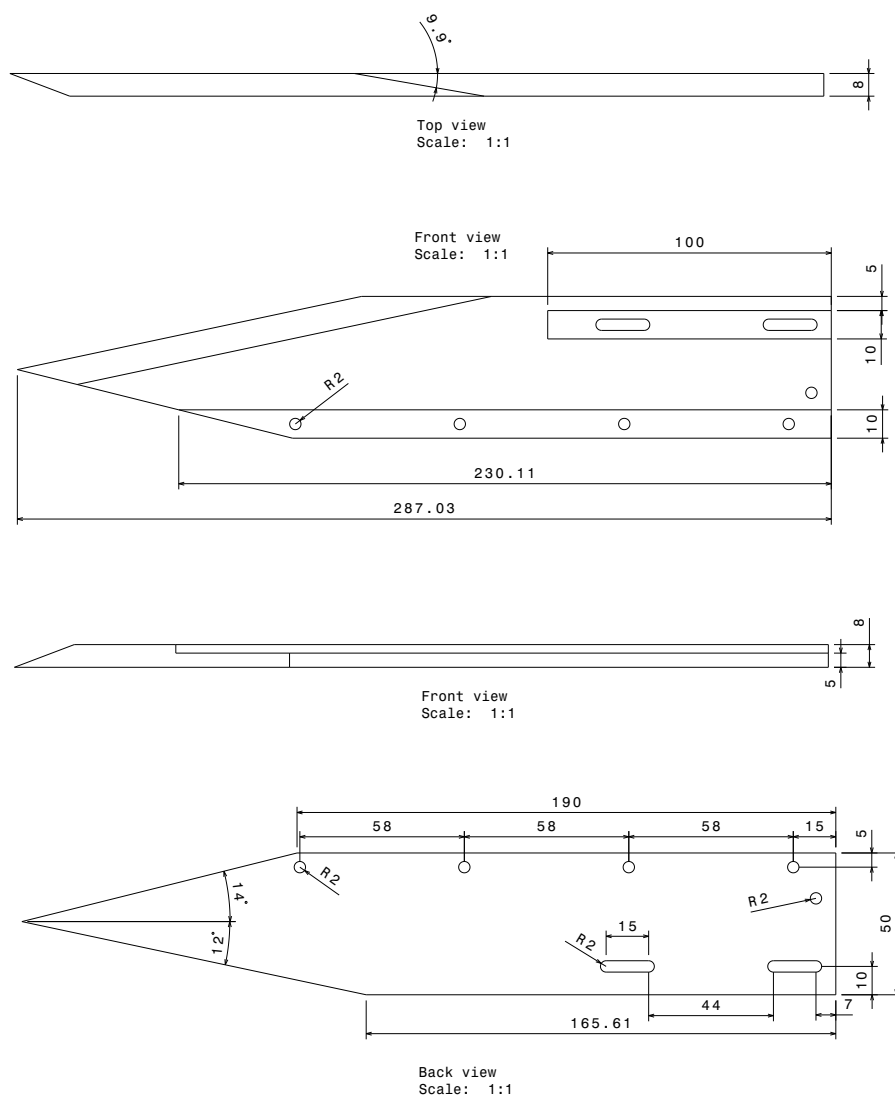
Compression surface of Oswatitsch intake wind tunnel model sidewall
